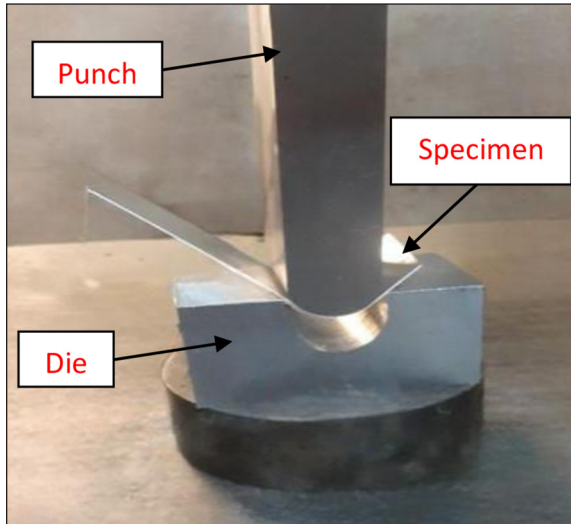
Experimental setup for the L-bending process and produced L-shaped sample
